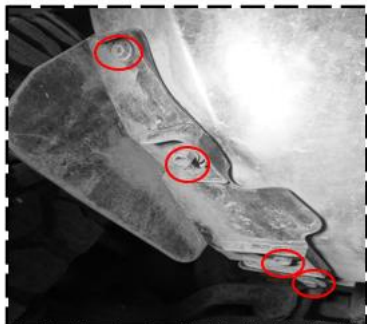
Bottom Edge Fender Liner Fastener Removal (Passenger Side Bottom-Up View Shown)
